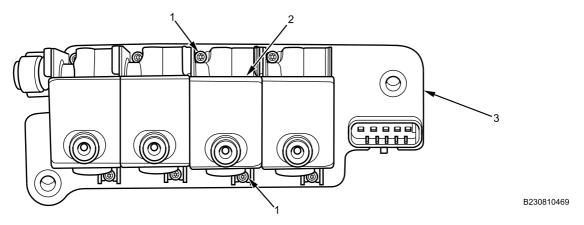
4-Pack Air Solenoid Module and Support Assembly.
